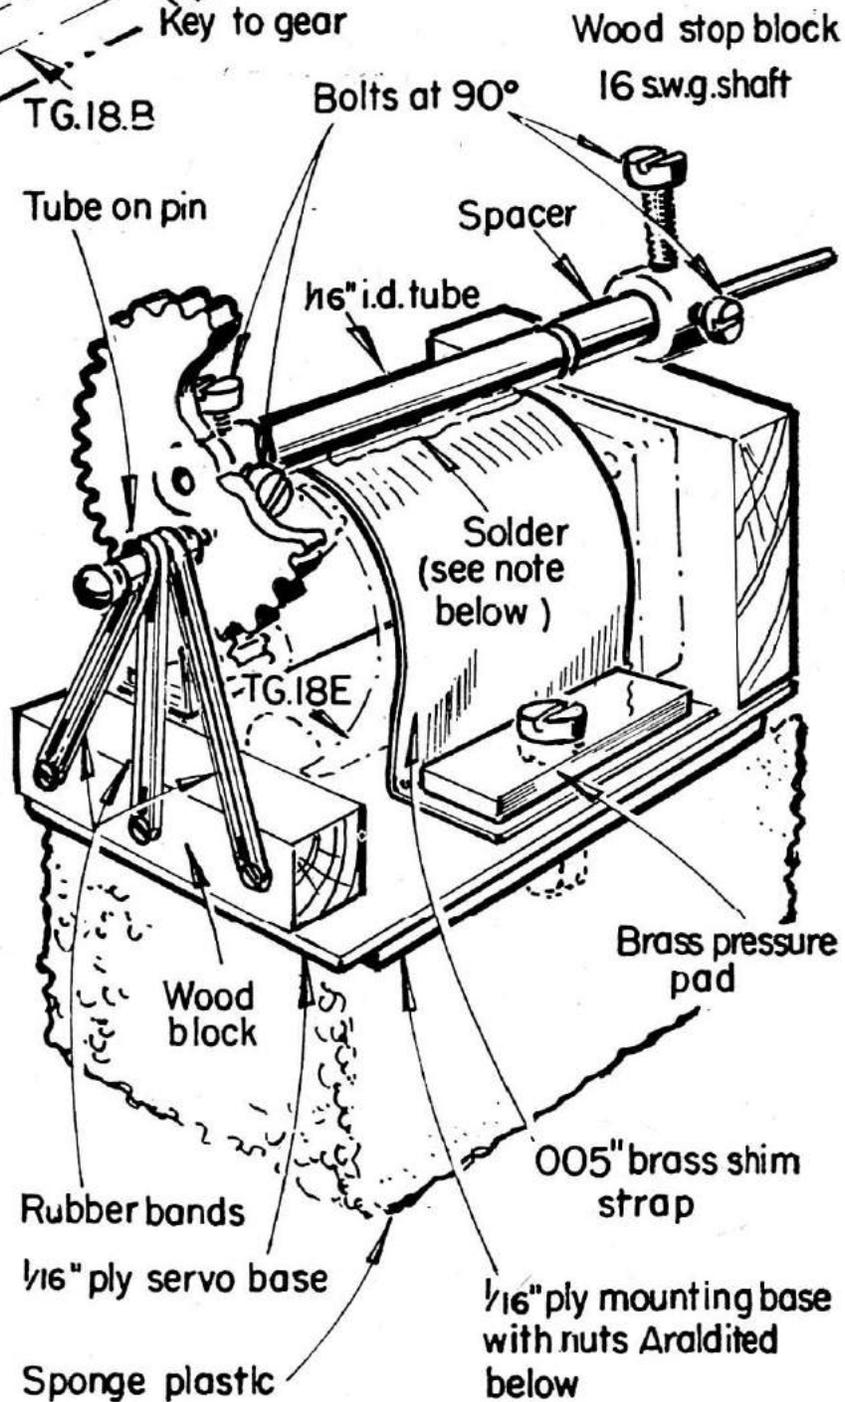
Riall version using T.G.18 E and brass Mighty Midget gear. Existing cutaway in motor case is enlarged to clear boss and screws of large brass gear. Small pinion gear is soldered to shaft if necessary. Shim brass and tube should give approximately correct gear meshing. Adjust by filing tube before soldering to close up mesh or use paper packing between brass strap and motor case to open up mesh. Spot solder tube to strap in situ, then remove to complete soldering as heat may affect motor casing. Up to three rubber band tensioners have been tried (one only in the Lovegrove version).
